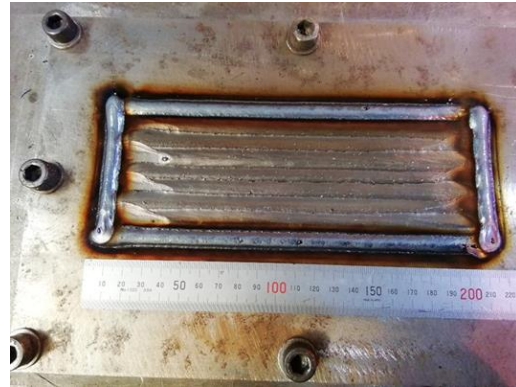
First layer of skin and core deposits, showing the tool path directions
